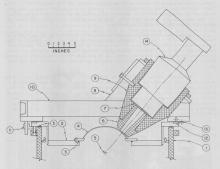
Cross sectional view of out-of-plane gamma-counter carriage and assembly.
